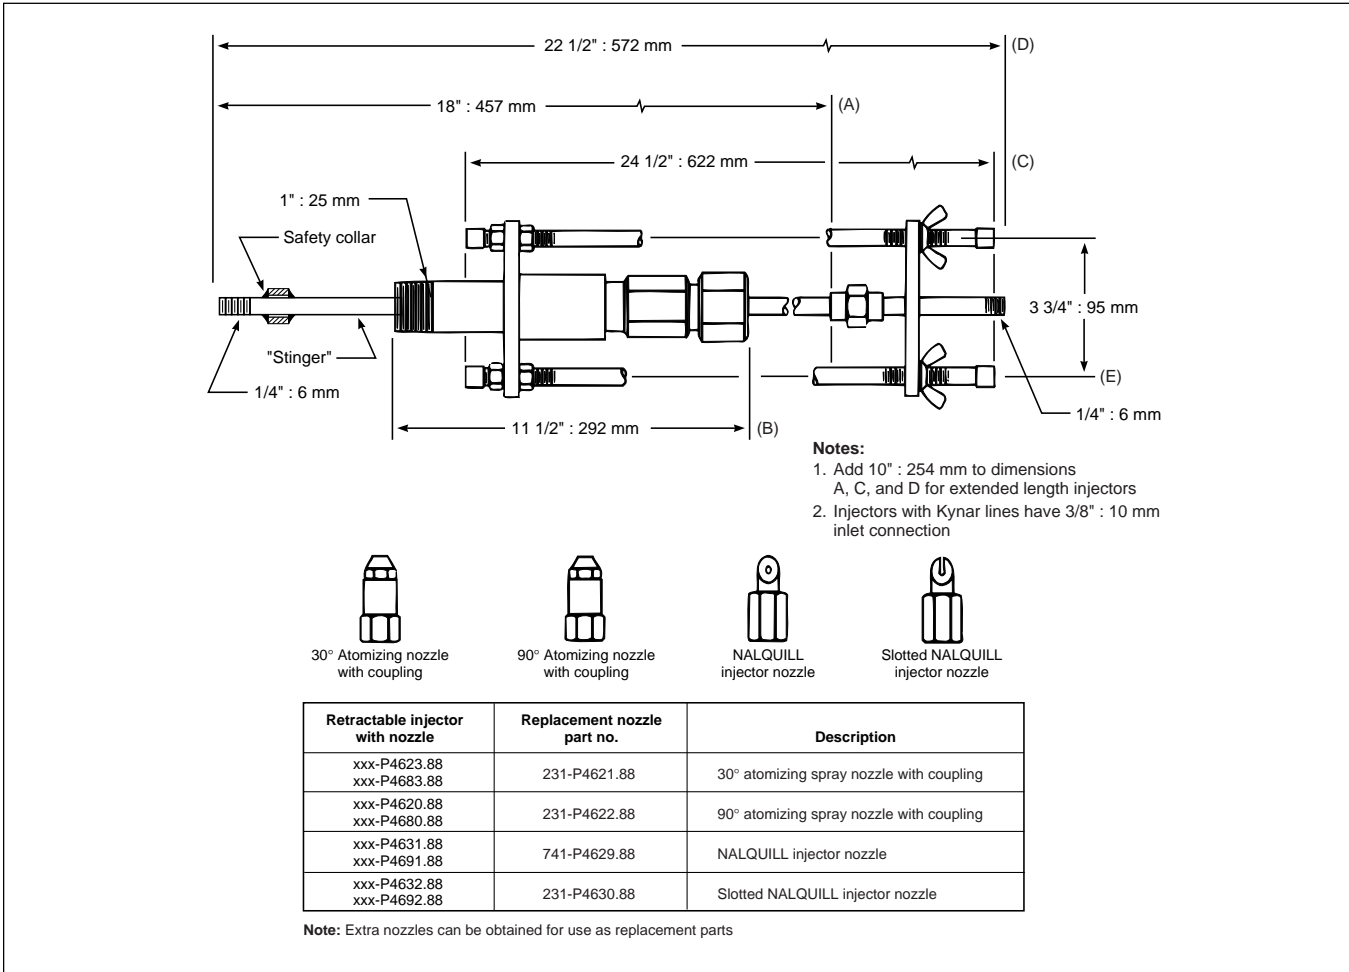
Nalco Retractable Injector with threaded stinger and nozzles
